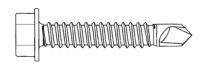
/4-14 HEX WASHER HEAD TYPE 6 SCREW
